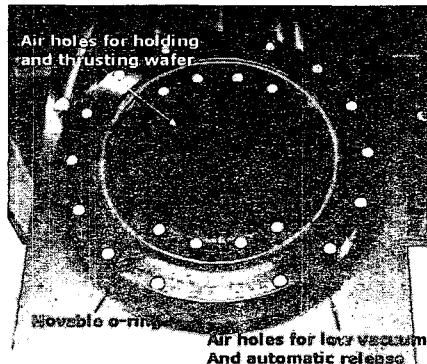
The wafer chuck consists of movable o-ring used for vacuum chamber and many air holes for holding the wafer, thrusting the wafer, sucking air, and demolding.
